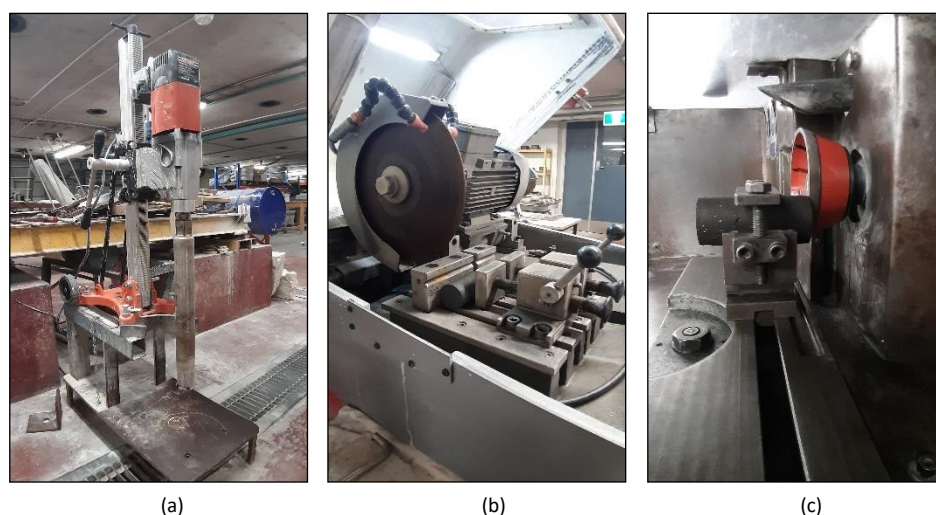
Machines used for the sample preparation process: a) coring machine, b) cutting machine and, c) grinding machine.
